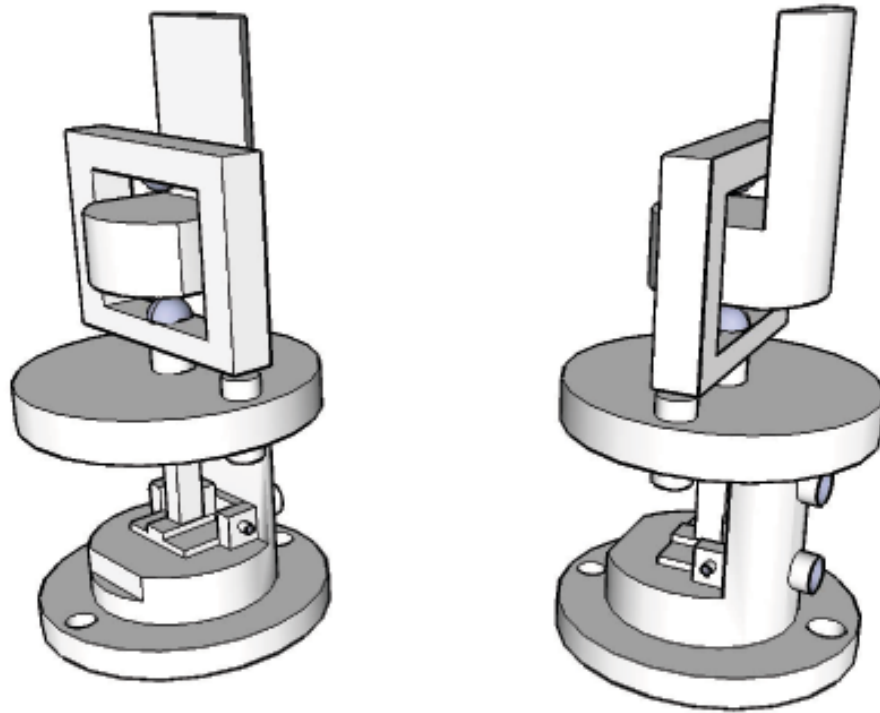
3D Schematic Drawing of MMTM Fixture and Load Head.
